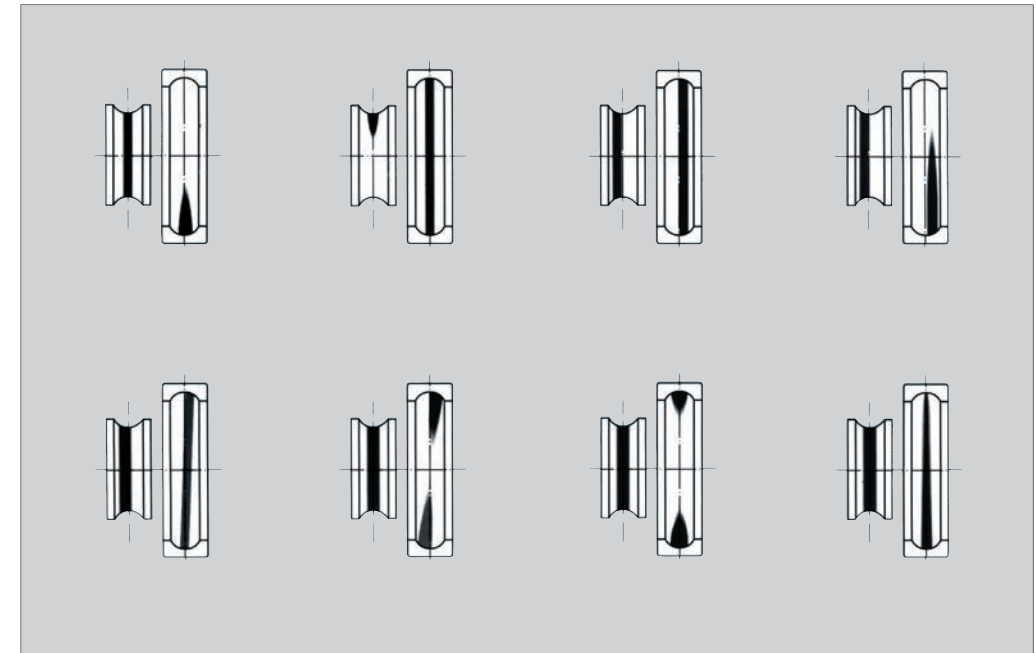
Typical Running Traces of Deep Groove Ball Bearings
